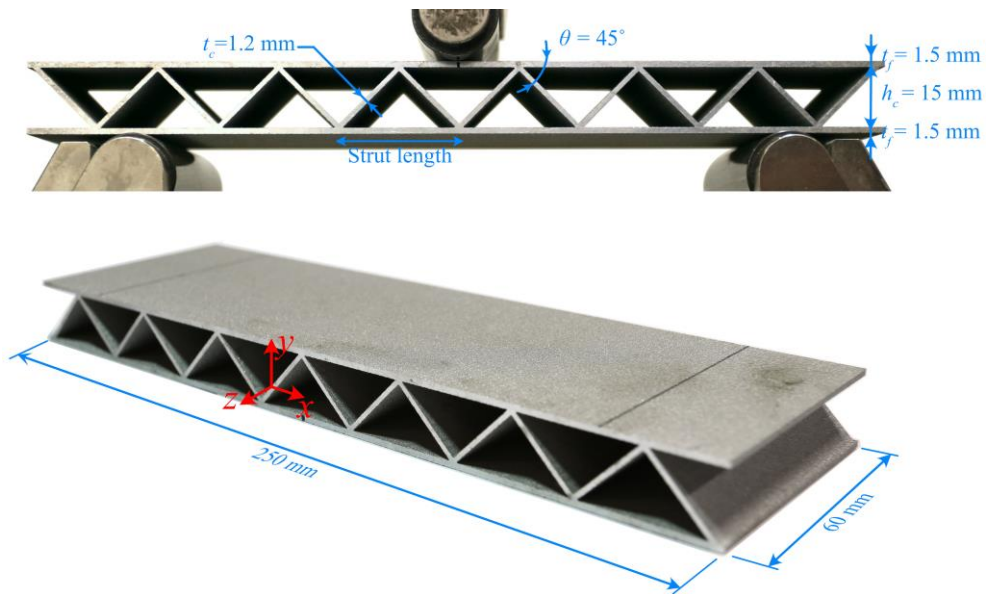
Photographs and dimensions of the corrugated sandwich panel.
